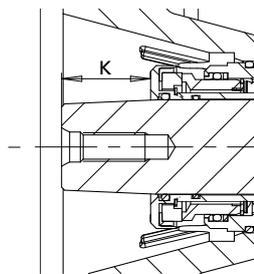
Reference dimension "K" from shaft end to KSB double cartridge seal
